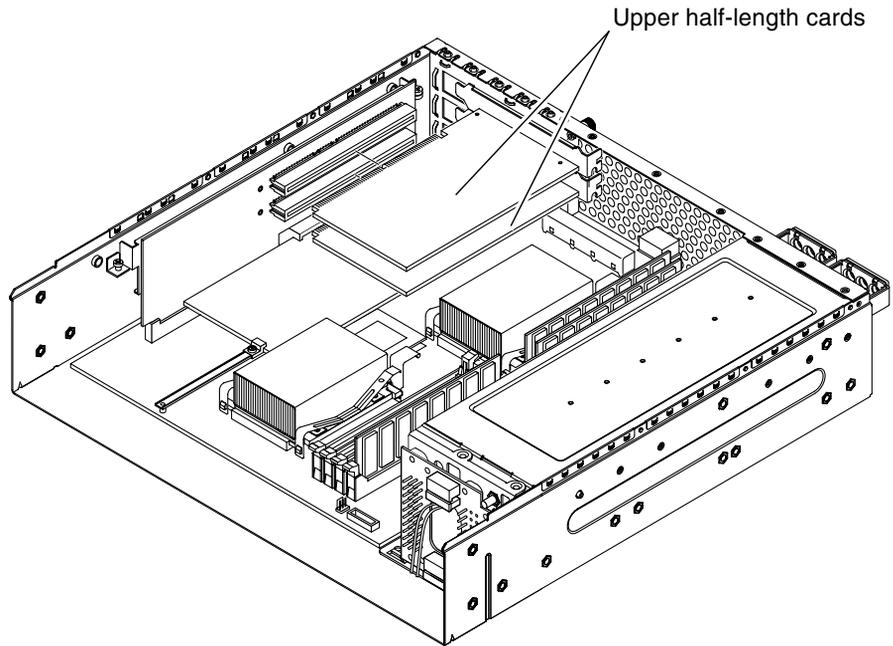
Removing and Installing the Upper Half-Length PCI Cards
